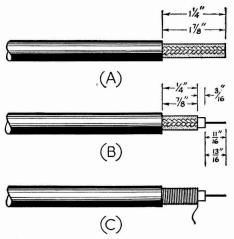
Cable-stripping dimensions for Jones Type P-101 plugs. Smaller dimensions are for ¼-inch plugs, the larger dimensions for ½-inch plugs. As indicated in C, the remaining copper braid is wound with bare or tinned wire and then tinned, to make a snug fit in the sleeve of the plug. Hold a hot iron to the sleeve after the cable is inserted to solder the sleeve to the braid.
